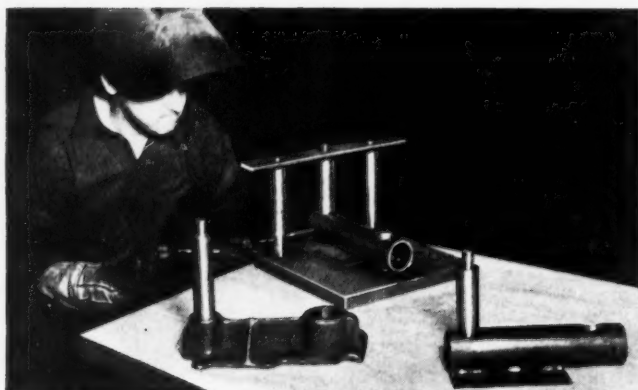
Bearing for Hand Trucks Showing, to the Left, Cast and, to the Right, Arc-welded Construction. The Simple Welding Jig is Also Shown
